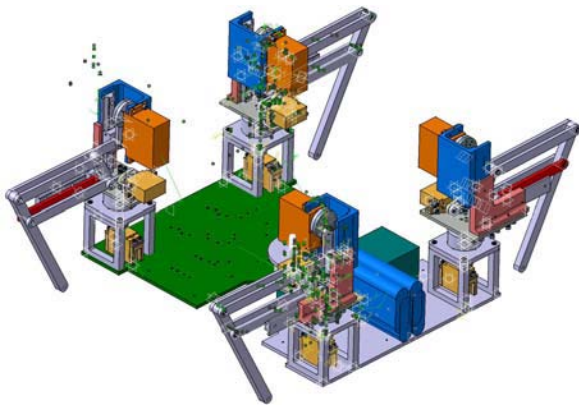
3-D design drawing of the quadruped mechanism of the ELIRO-1.
